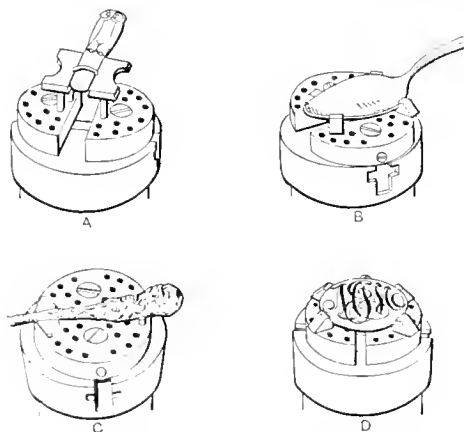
The Way in which Irregularly Shaped Pieces are held by the Auxiliary Attachments
